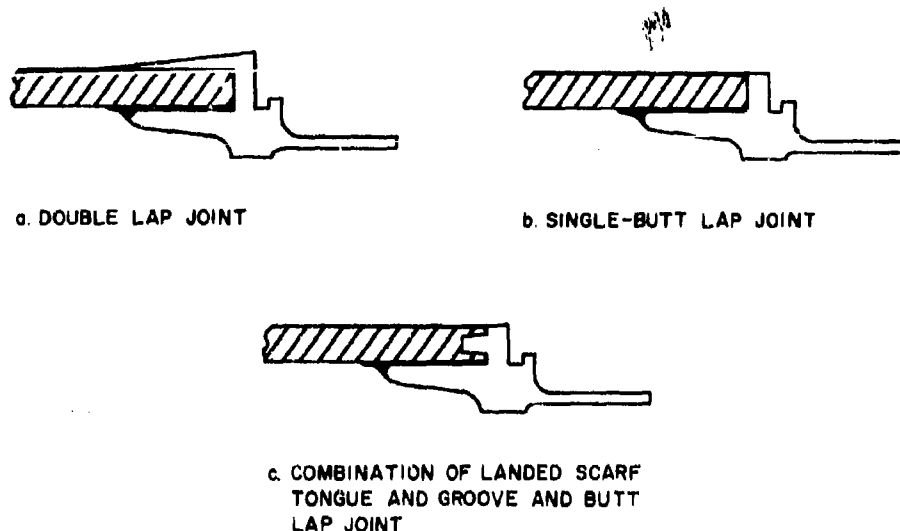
Methods of Attaching "A" Sandwich Radomes
